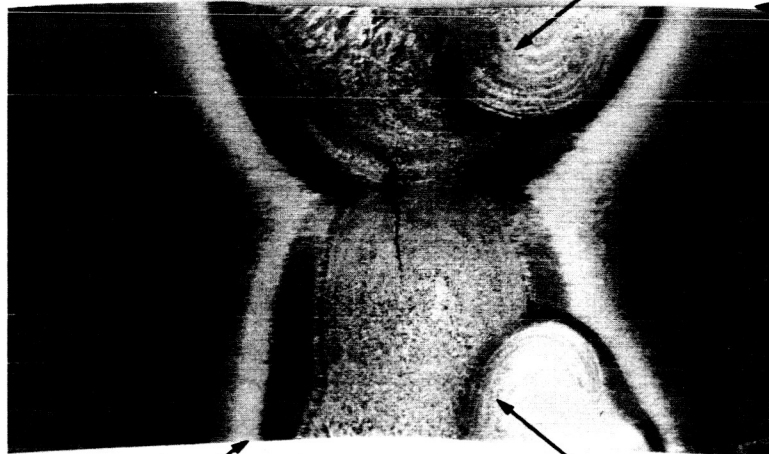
PROFILE OF RUPTURE PRODUCED BY HYDRAULICALLY BULGE TESTING THE SINGLE BUTT WELDED PANEL WITH FILLER WELD PASSES. WELD OF CROWNS HAD BEEN GROUND OFF.
